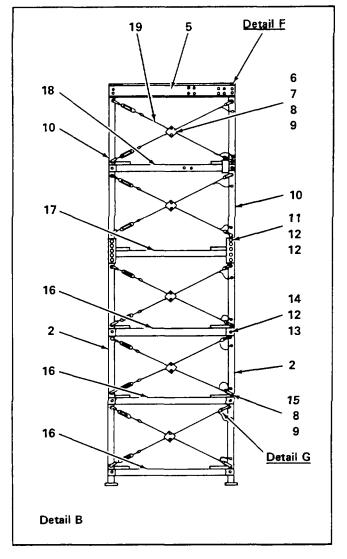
Tower Assembly (Sheet 2 of 5)
